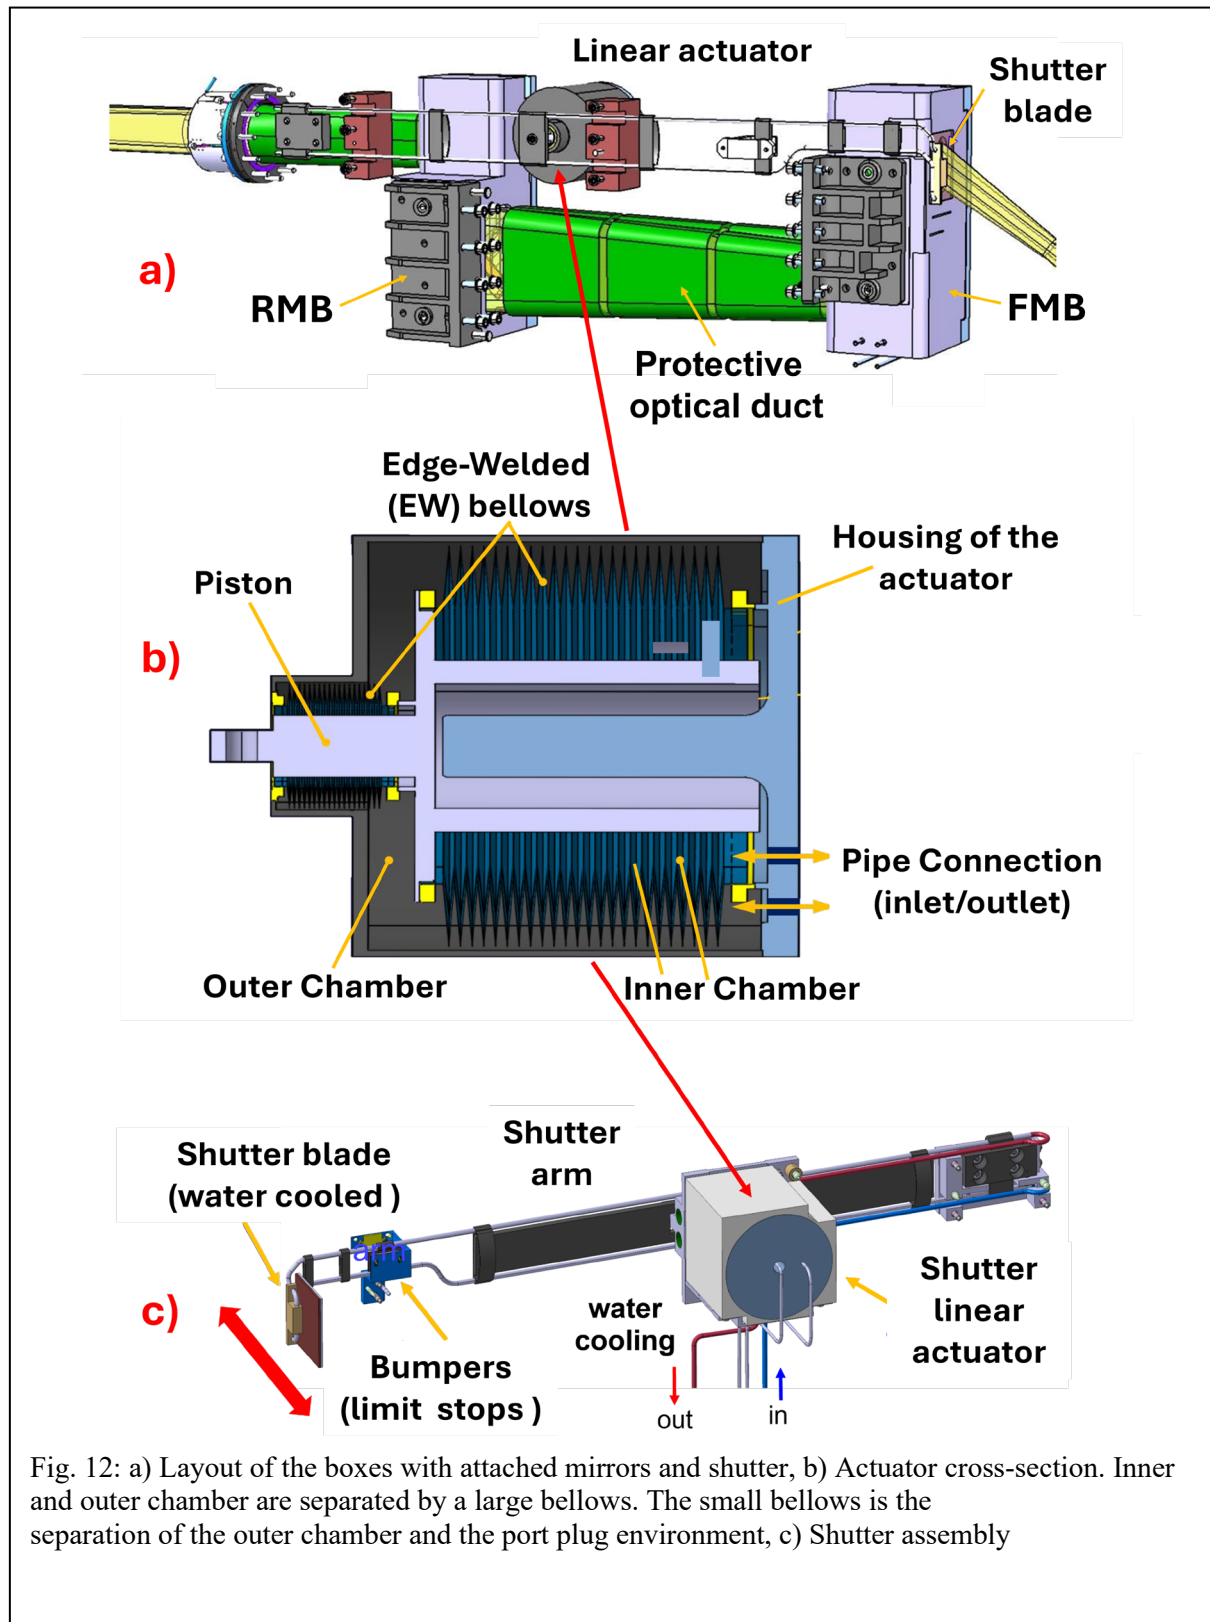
a) Layout of the boxes with attached mirrors and shutter, b) Actuator cross-section. Inner and outer chamber are separated by a large bellows. The small bellows is the separation of the outer chamber and the port plug environment, c) Shutter assembly
